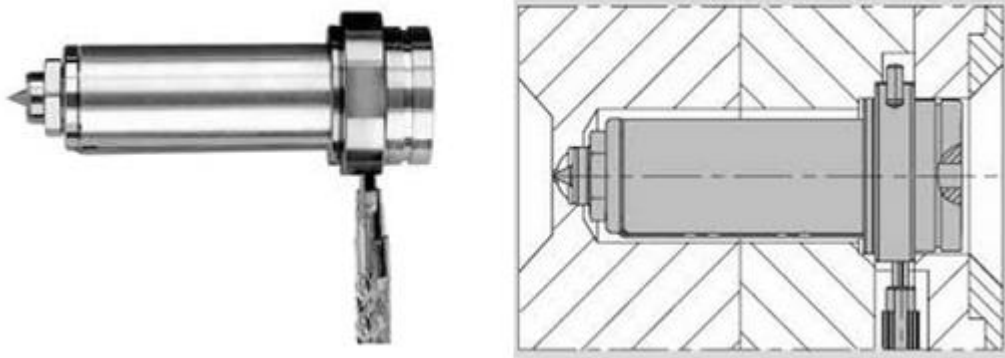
Hot nozzle Techni Shot from Hasco [28]
